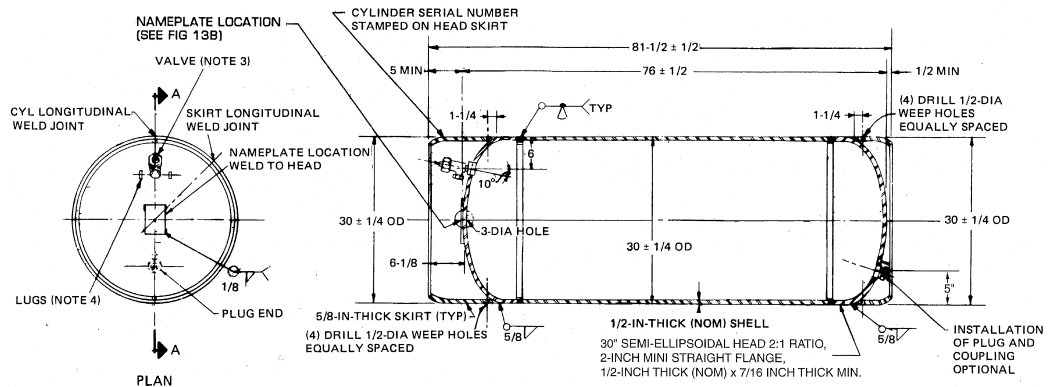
Technical drawing of a 30B cylinder from side and end. All measure of length and errors of these are given in inches [3].
